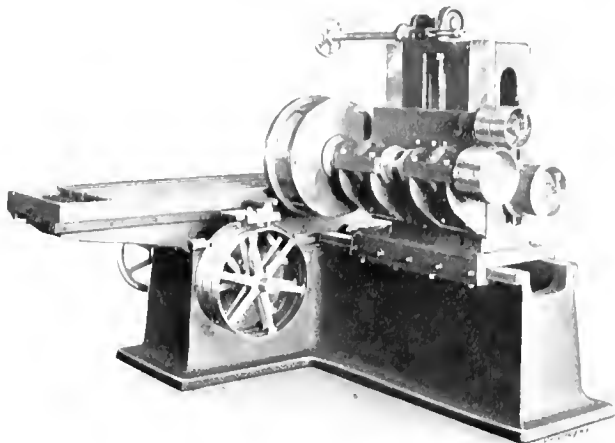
Rear View of Edge Grinder showing Spindle Drive and Table Reversing Mechanism.
